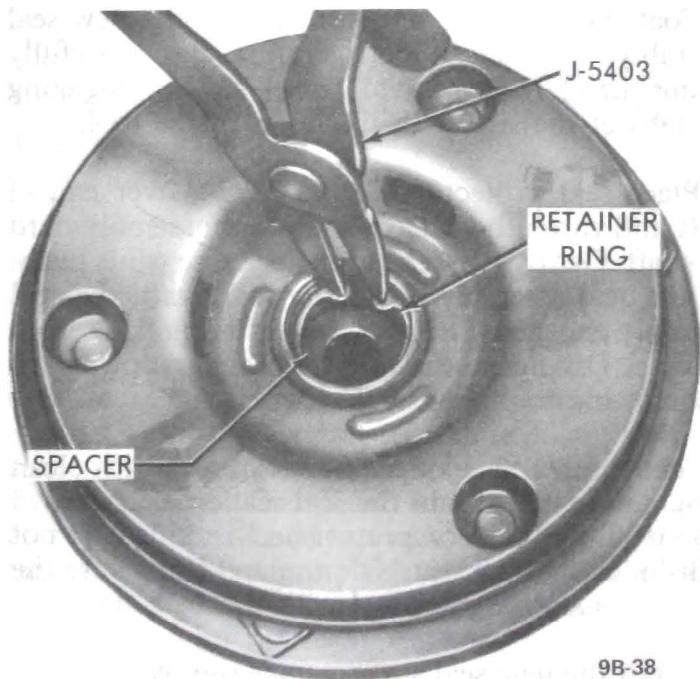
B-43 - Removing or Installing Retainer Ring in Clutch Drive Plate
